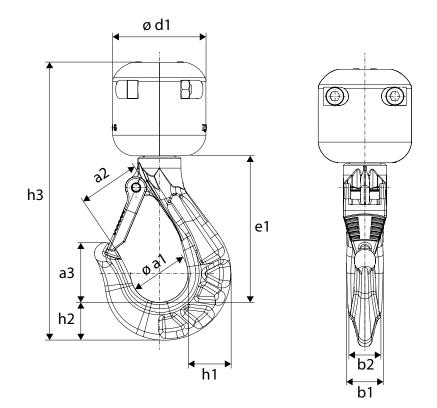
Dimensions of the 1-fall stainless steel hook and hook block
